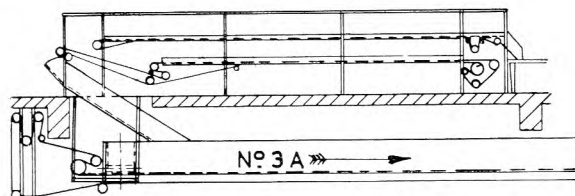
ELEVATION OF BAG OPENING TABLE CONVEYOR.
